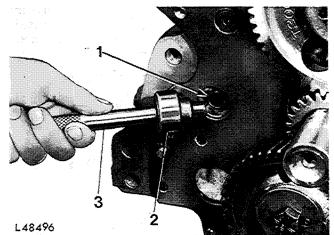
Driving in Valve Seat Bushing of Oil Pressure Regulating Valve
